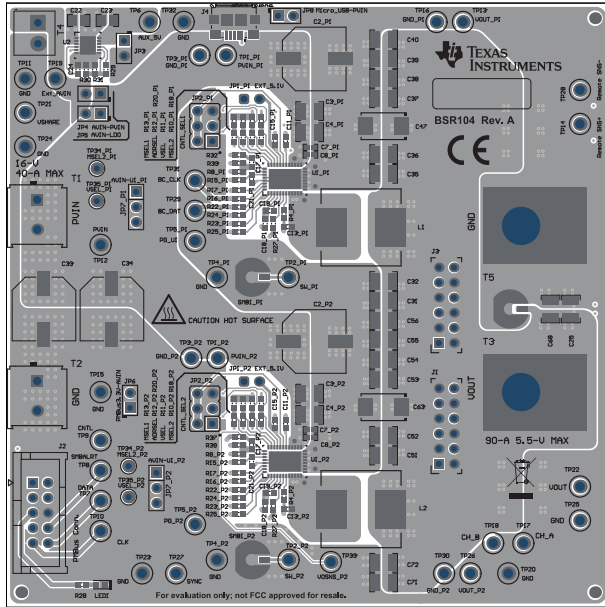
TPS546D24SEVM-2PH Top Side Component View (Top View)
